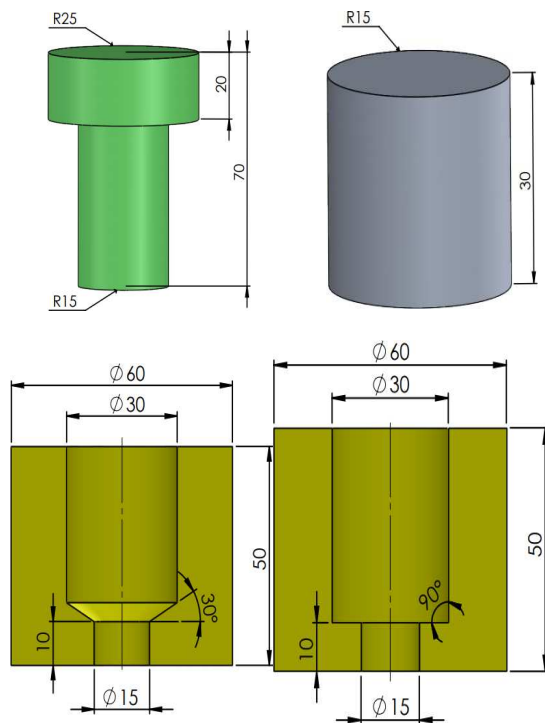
Dimensions of the punch, the workpiece and the dies with the angle of 30° and 90°
